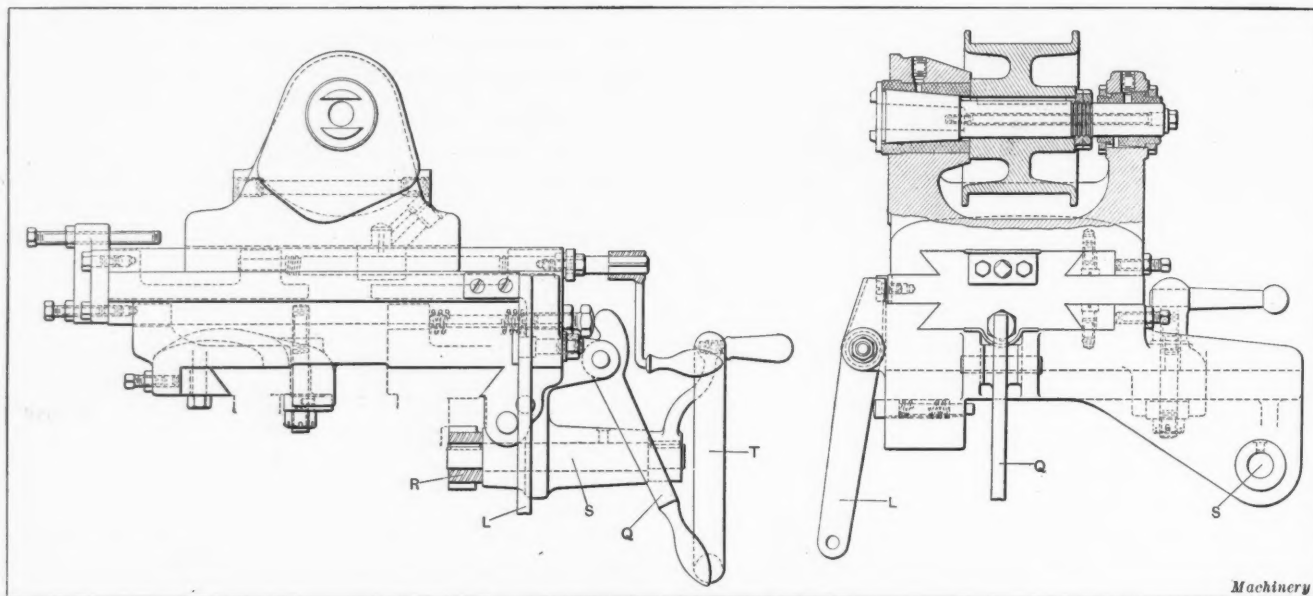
Partial Cross-sectional View and End View of Cutter-head
